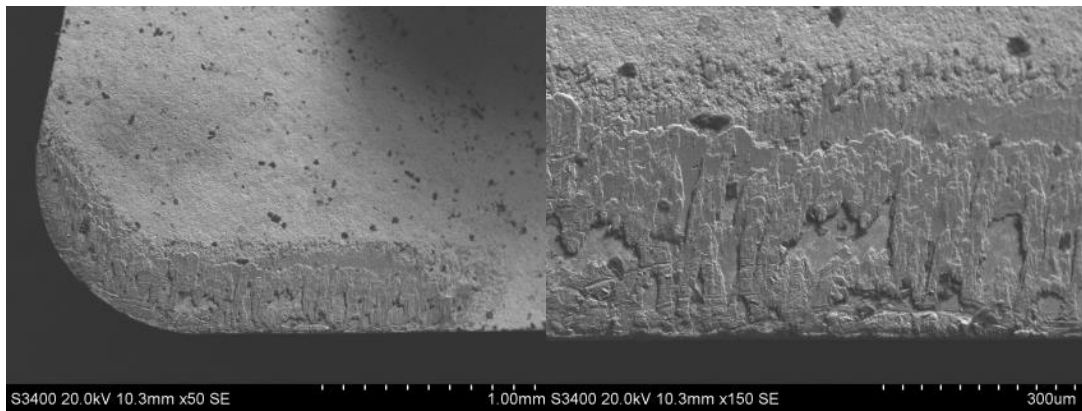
SEM images of cutting tool when cutting speed is 30m/min and feed rate is 0.30 mm/rev (left) and amplified part (right) after machining 20 cm<sup>3</sup>
